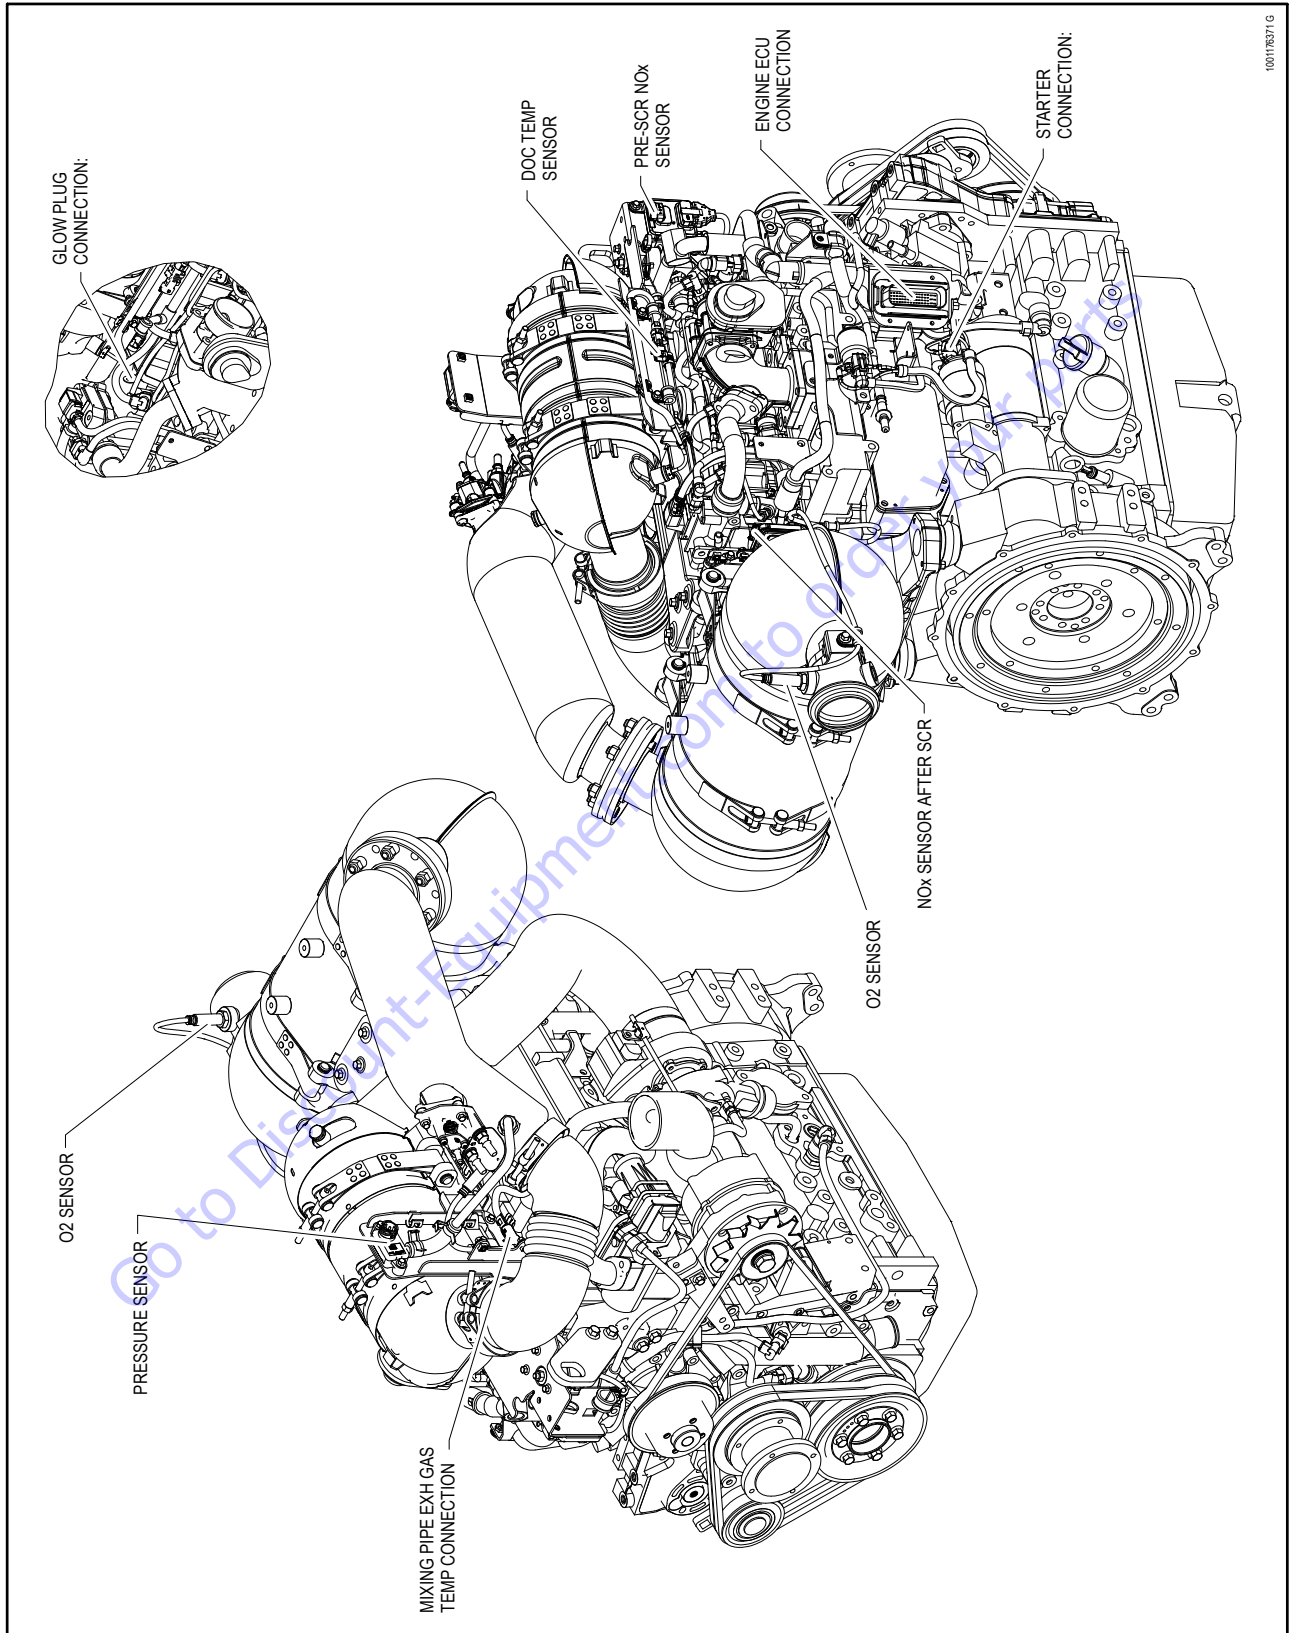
Diesel Exhaust Fluid (DEF) System - Sheet 8 of 8
